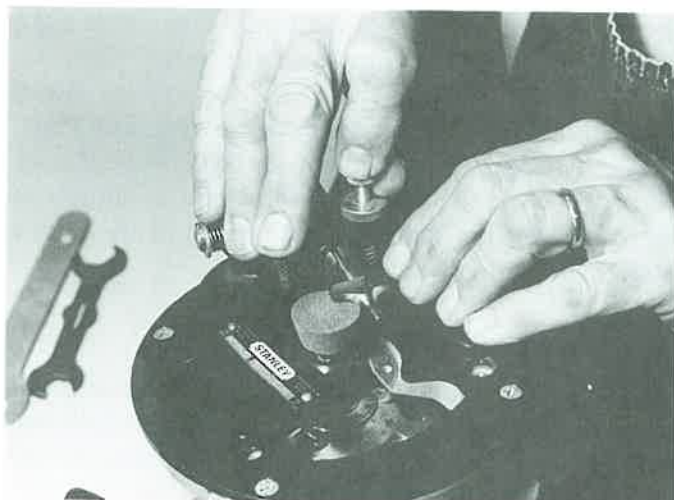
This grinding jig allows you to sharpen router bits. (Stanley Tools)
